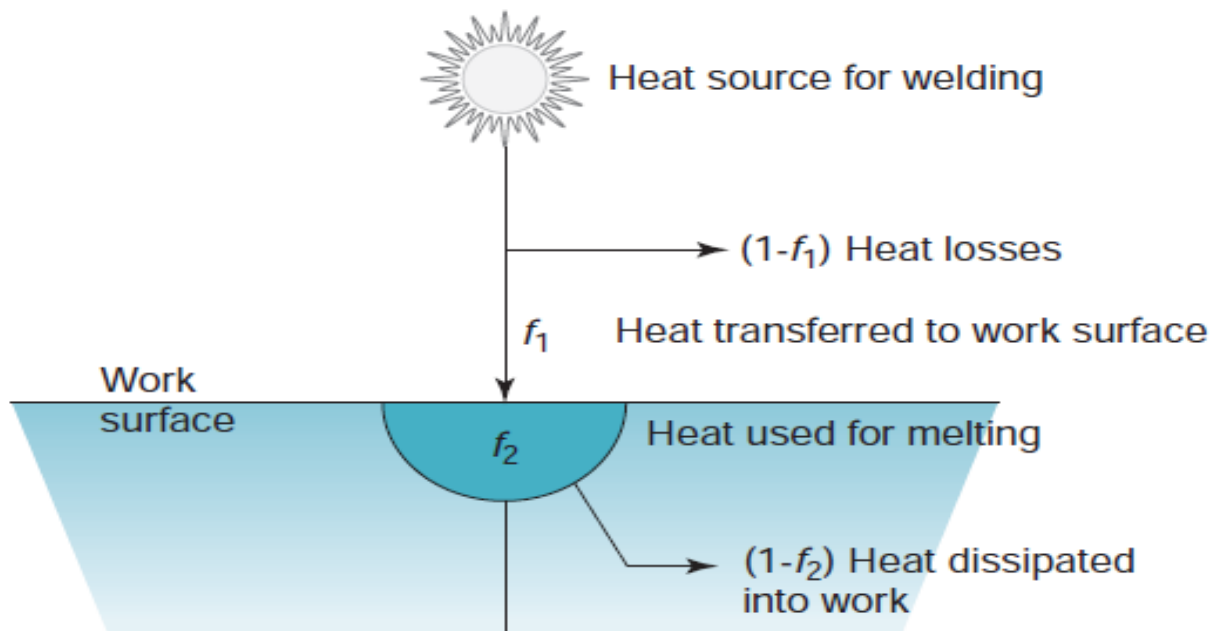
Heat transfer mechanisms in fusion welding.
